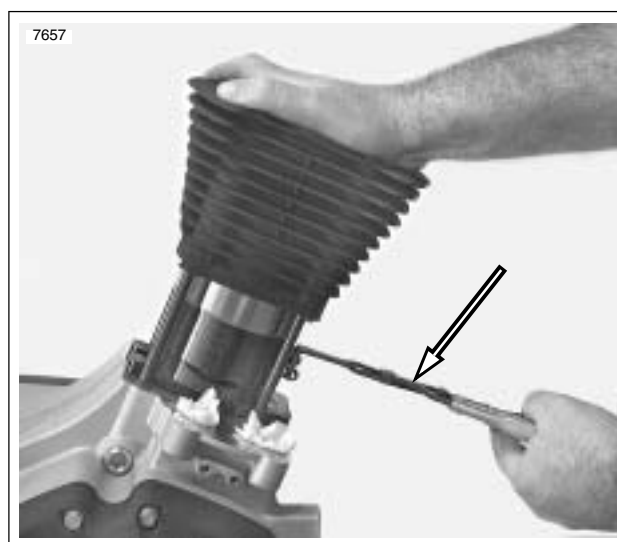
Compressing Piston Rings Using Piston Ring Compressor (Part No. HD-96333-51C)
